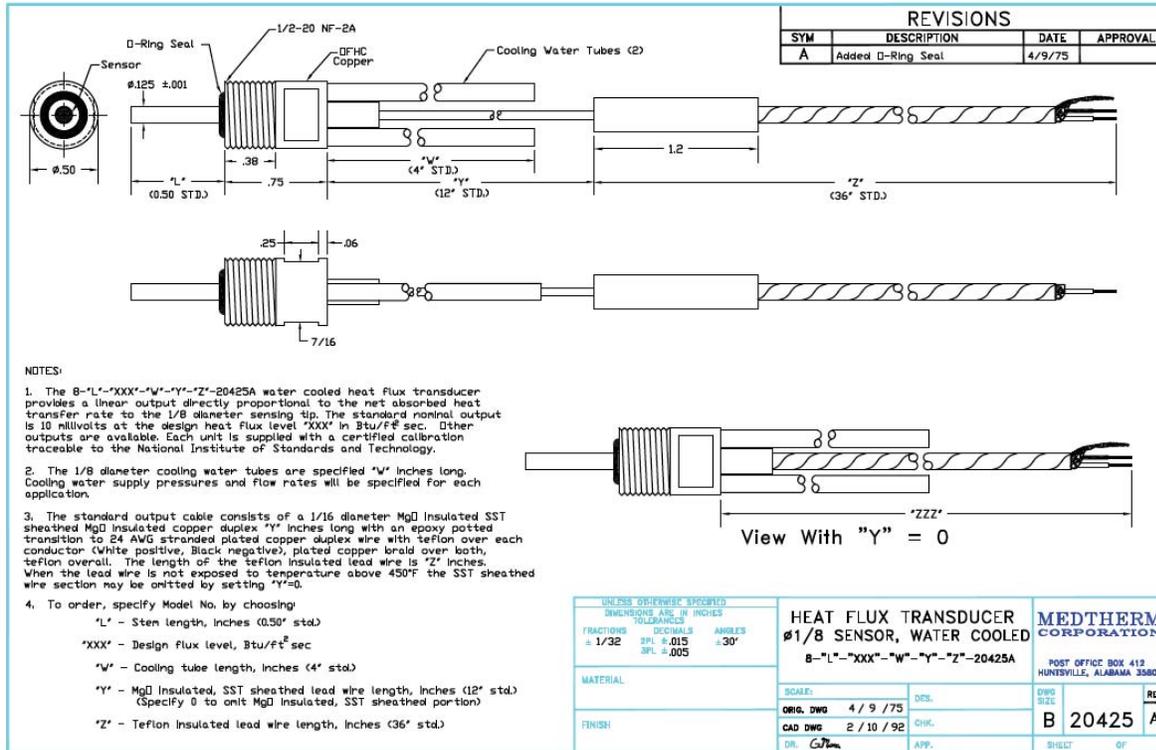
1/8" heat flux gage as seen in Medtherm schematic. The 1/16" model for 25 mm burner is 4-10SB-1.4-0.43-4-36-21919T. It has 1/16" diameter, 1.4" long stem. The cylindrical body has 1/4 -28 NF-2A thread to integrate with the burner. It is also equipped with a T type thermocouple to measure the surface temperature at the sensor, although other thermocouple types are acceptable. The O-ring is not included in this model but this option is recommended to seal the burner inlet plenum (i.e., upstream of the ceramic honeycomb).
